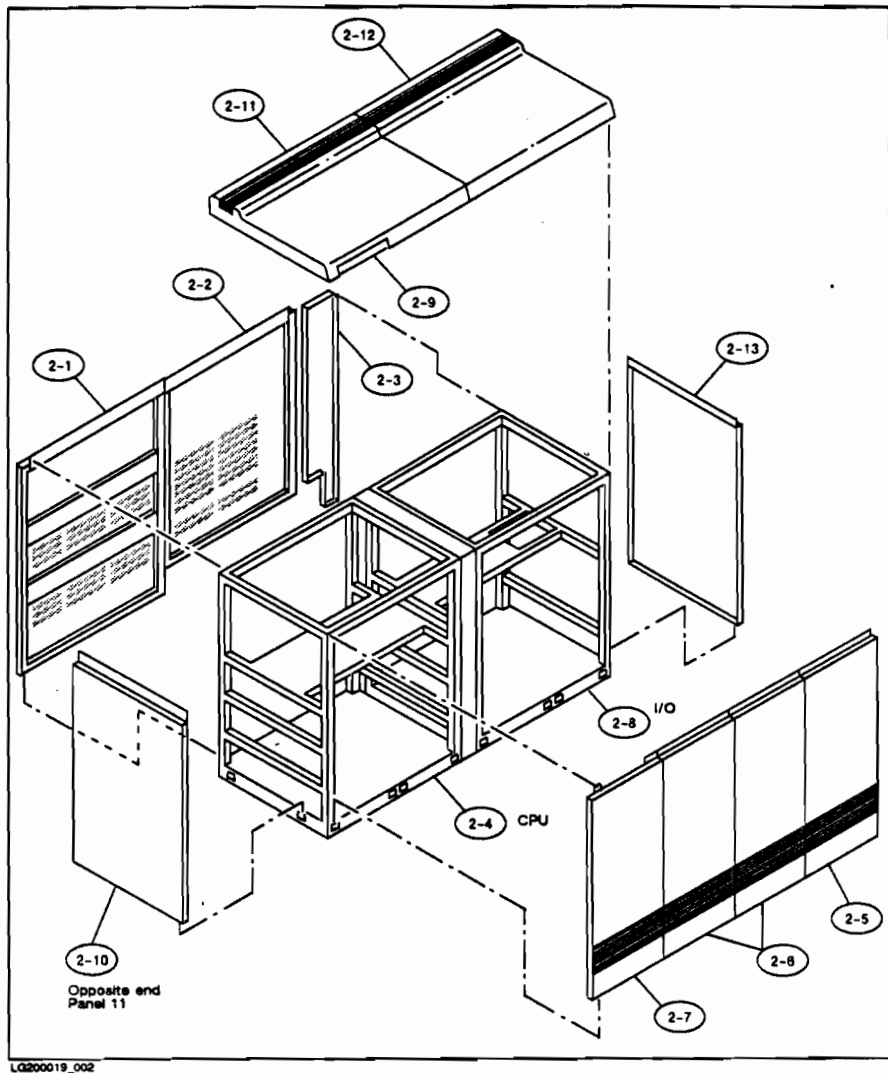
HP 3000 Series 64/68/70 Exploded View
